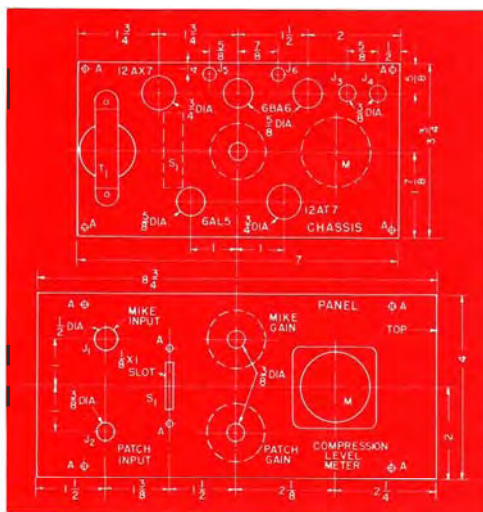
PANEL-CHASSIS LAYOUT diagram. The panel plate is viewed from the front; chassis plate from the rear. Drill mounting holes to match feet on T_1 and locate it between the plates if possible. Holes marked "A" are for corner posts, which should be 3 inches long, tapped at both ends.
